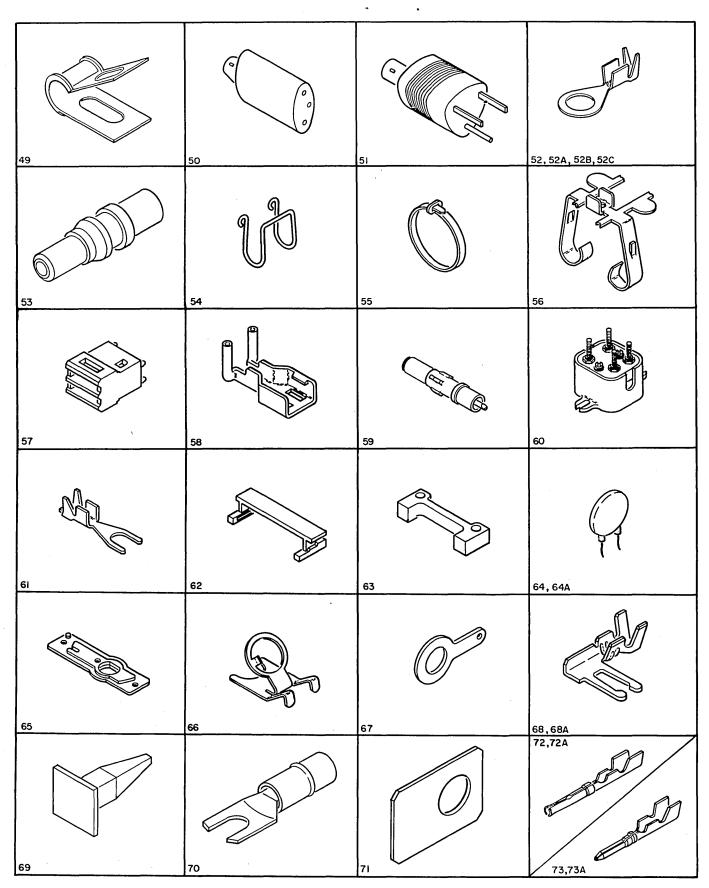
Cable Component Parts. Sheet 3 of 3. Index Nos. 49-73A.
